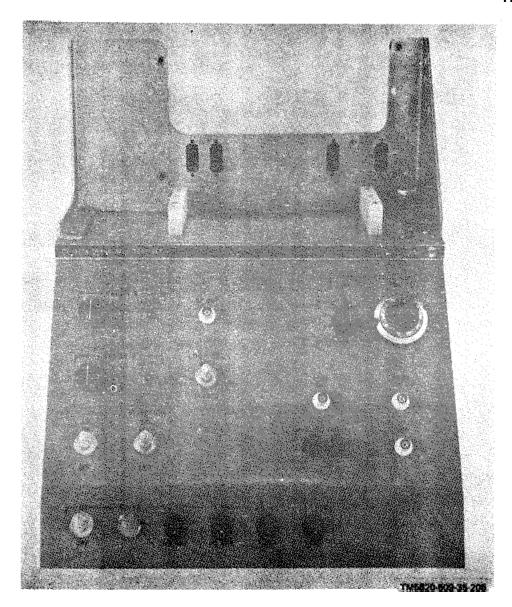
Test Fixture for CV-1377A/PRC-47, Suggested Layout.
